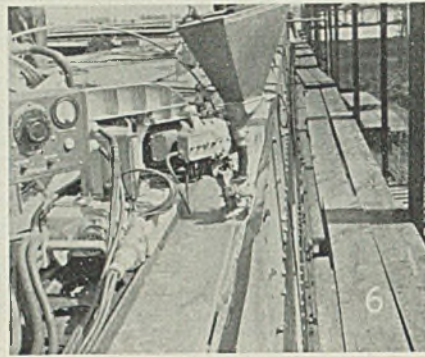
Making corner butt joint between spar deck and shear stake of an ore freighter
